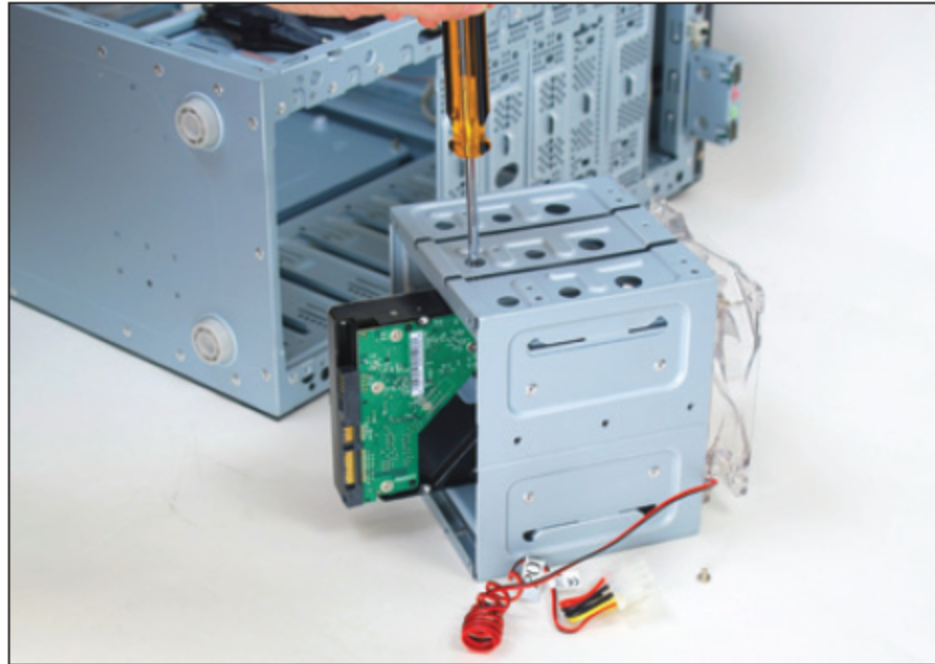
Install the hard drive in the bay using two screws on each side of the drive
